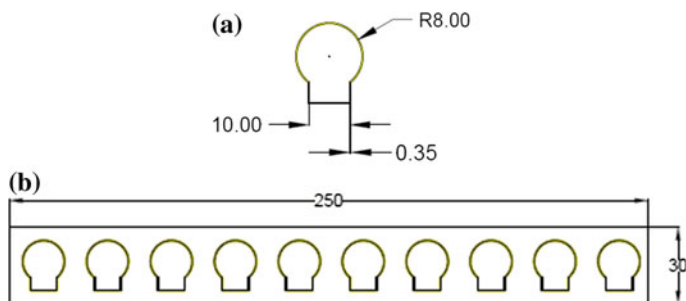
a Single μ PAD; b an array of μ PAD. All dimensions are in mm
